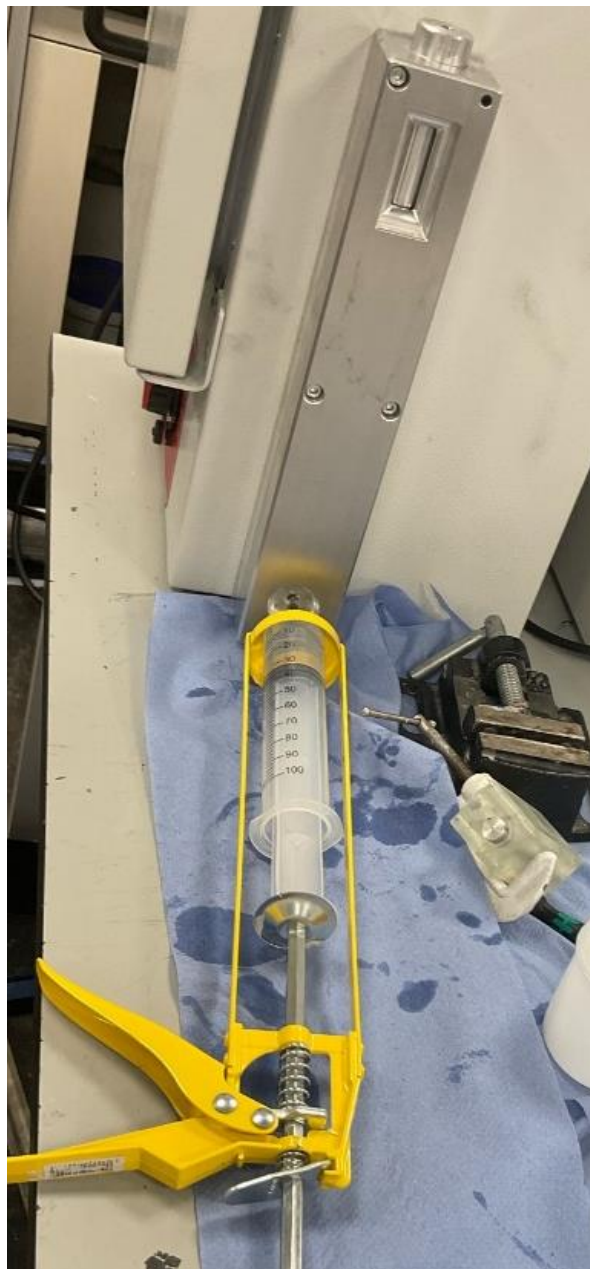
Injection process using 100 ml syringe into base of mould cavity while mould is placed vertically.
